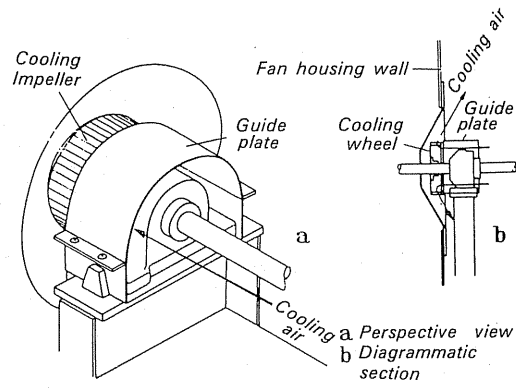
(a and b) Bearings cooled by means of a special drum impeller.
